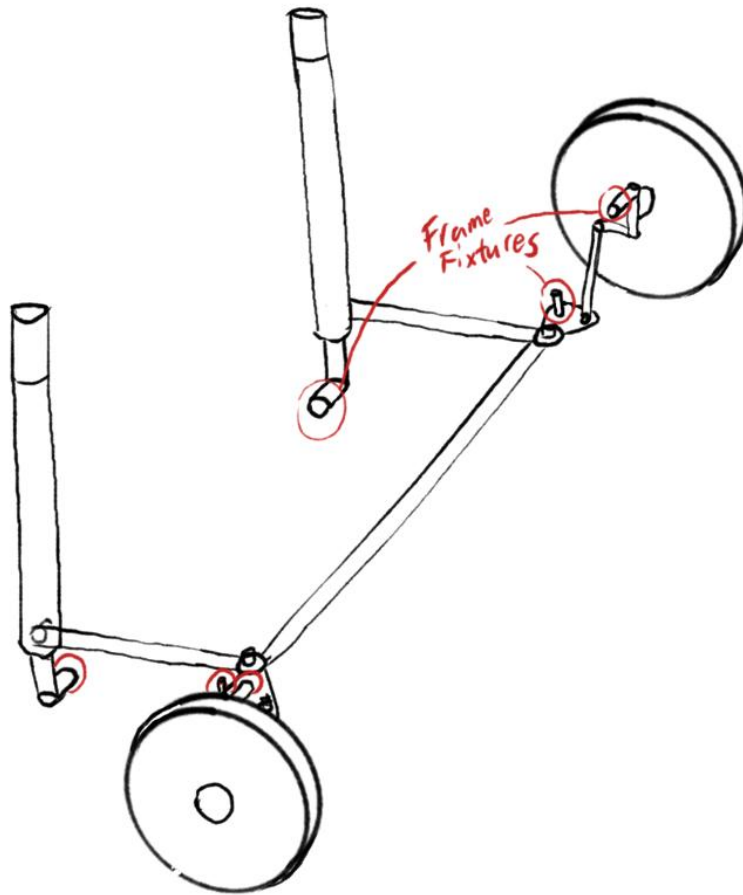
Sketch of steering system Concept 1: Three-piece lever steering (Source: Author).
